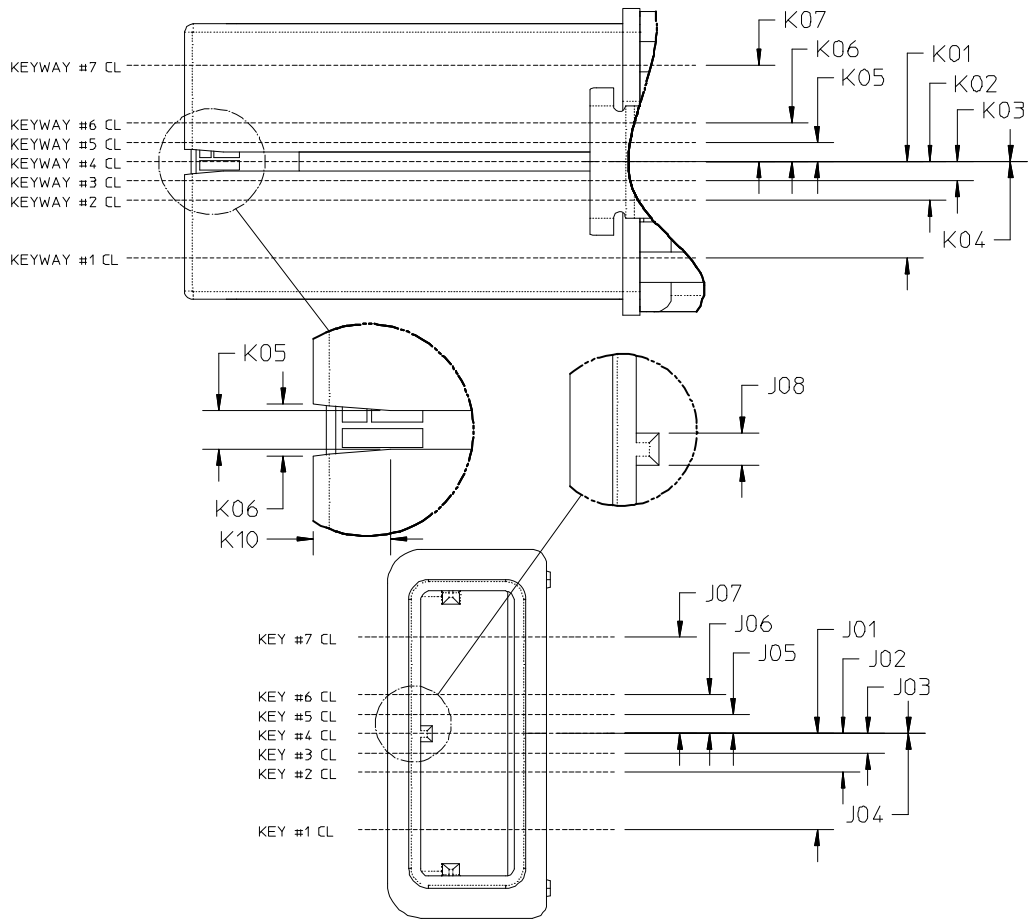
SHELL BLOCKING KEY DIMENSIONS
